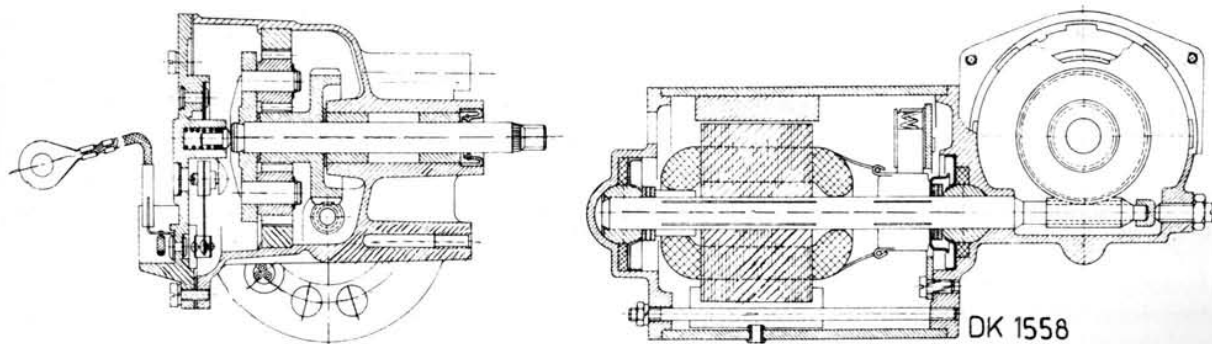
/1 - Sectional View of Windscreen Wiper (motor and gear casing)
